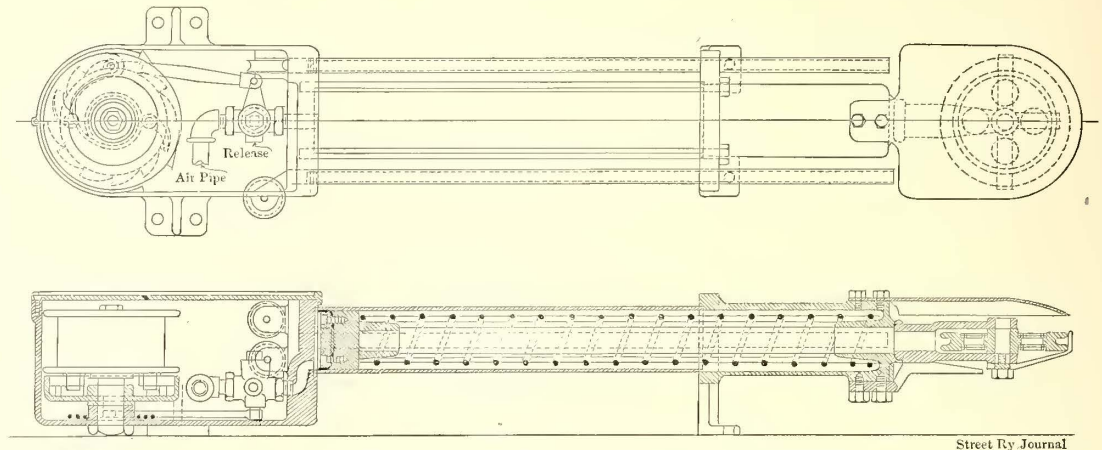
SECTION AND PLAN OF TROLLEY CONTROLLER
